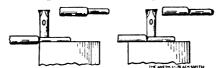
GATE HOOK AND FIRST STEP IN ITS CONSTRUCTION.
